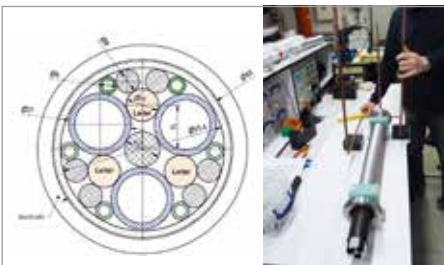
Cross-sectional drawing (left) and picture of the assembly of the test specimen (right) in which the inner conductors are held in the correct position inside the corrugated tube with hoses and tubes made of PE.
